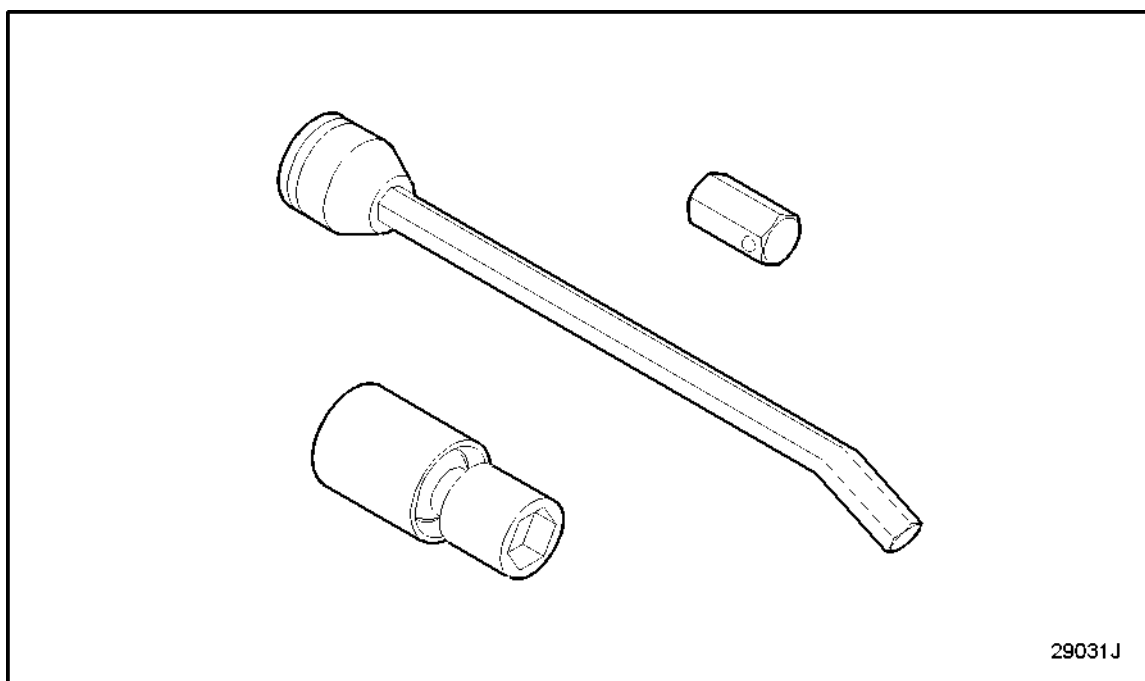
Block Assembly Wrench Set (16V),J 25451-B
